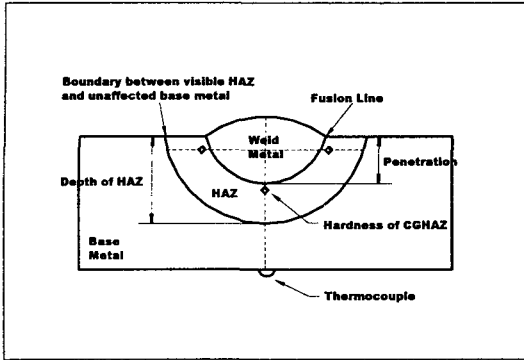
The cross sectional view of the bead-on-plate weld.
